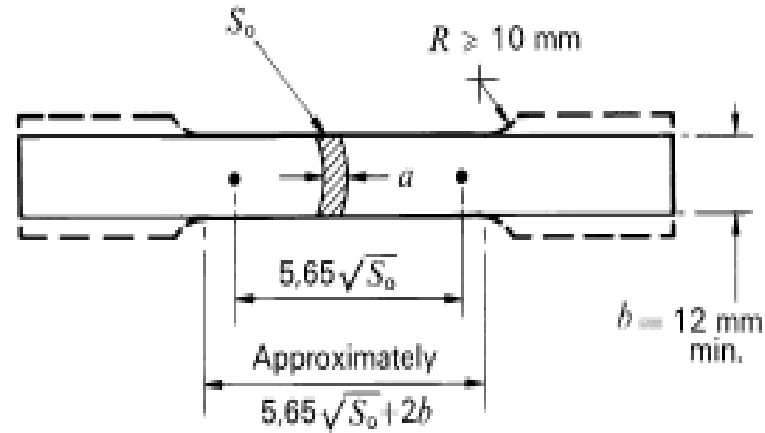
Test specimen dimensions for pipes and tubes - I
